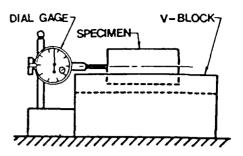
Assembly for Determining the Flatness and Perpendicularity of End Surfaces to the Specimen Axis
